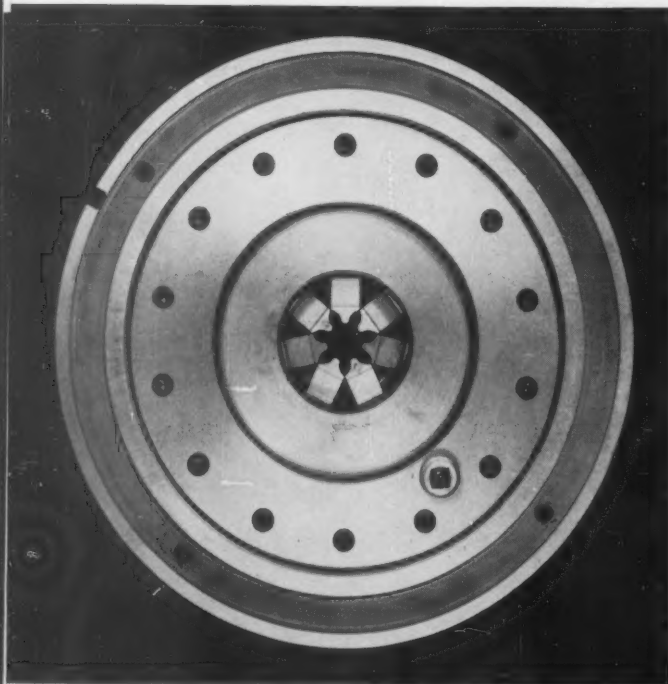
Seven formed cutter blades, assembled radially in a cutter fixture on machine seen in Fig. 2, are fed inward to form spaces between adjoining teeth of gears.
